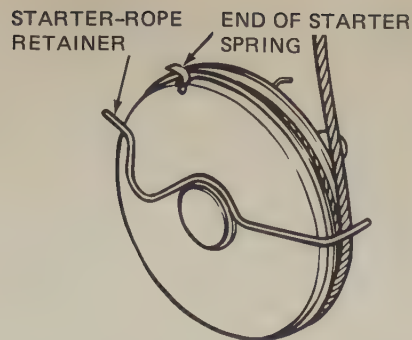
When installed, the end of the starter spring hooks over the edge of the cover slot. (Evinrude Motors Division of Outboard Marine Corporation)
